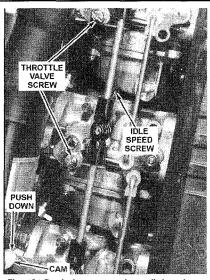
Push the cam to close all throttle valves, then tighten the valve screws by rotating them counterclockwise
